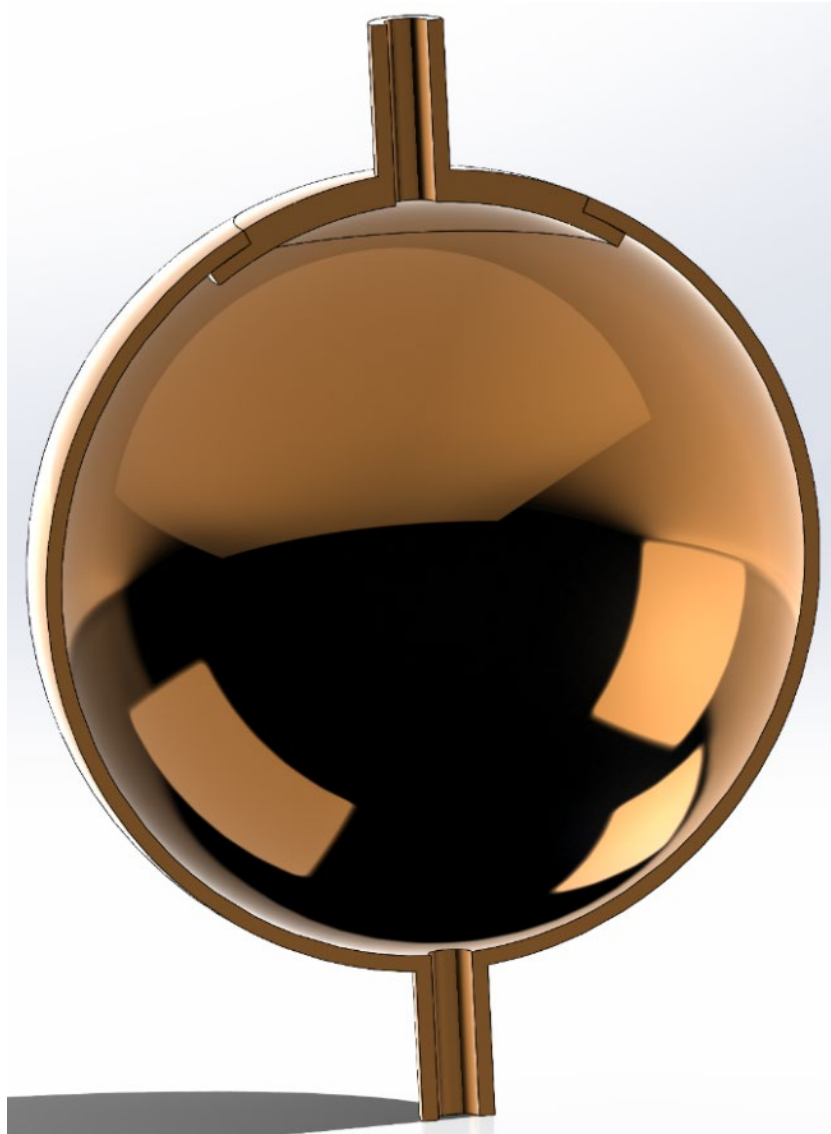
Cutaway view of the assembled "innovative" PV to show how the minor body piece seats against the major body piece.
